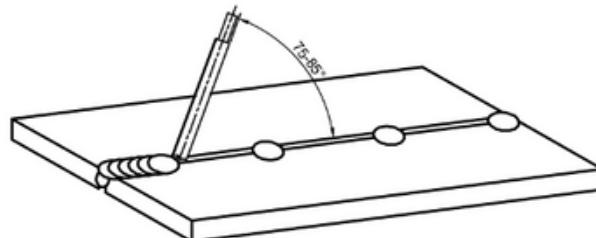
Angle to be Given to the Electrode in Brass Welding
